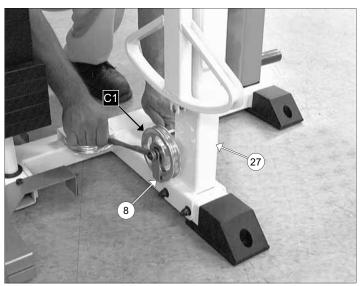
Next, attach one Pulley 4 1/2 Rd. (#67-Labeled C1) and one Cable Retainer Bracket (#8) to the Leg Extension Front Frame (#27) using one Hex Head Cap Screw 3/8-16 X 4 1/4 (#104), one Flat Washer SAE 3/8" (#93), and one Nylon Insert Lock Nut 3/8-16 (#119).
